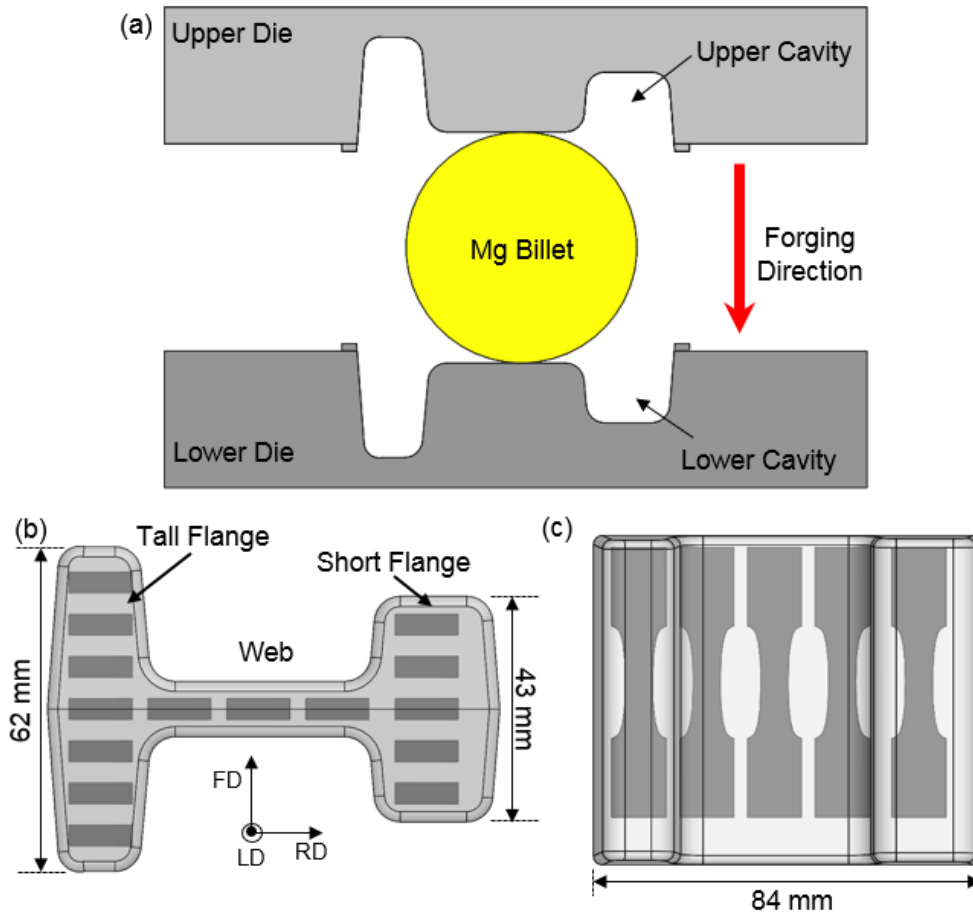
Schematic of (a) die design and forging orientation, (b) view along the LD of the forging showing basic forging dimensions and specimen locations and (c) view along the FD showing more forging dimensions and specimen locations. Note, LD: Longitudinal Direction, RD: Radial Direction and FD: Forging Direction.
